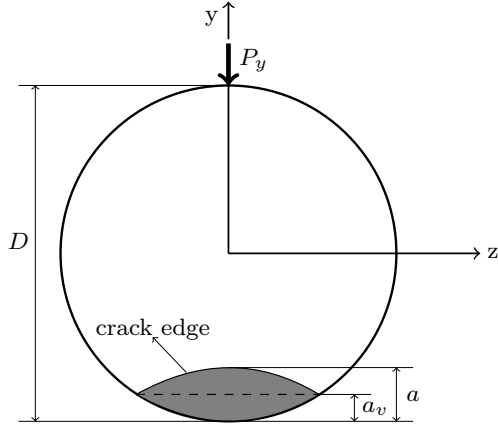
Shaft cross-section with a fatigue crack
